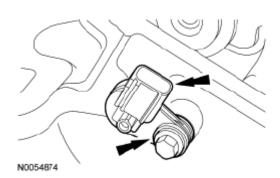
Locating RH CMP Sensor Bolt Courtesy of FORD MOTOR CO.
